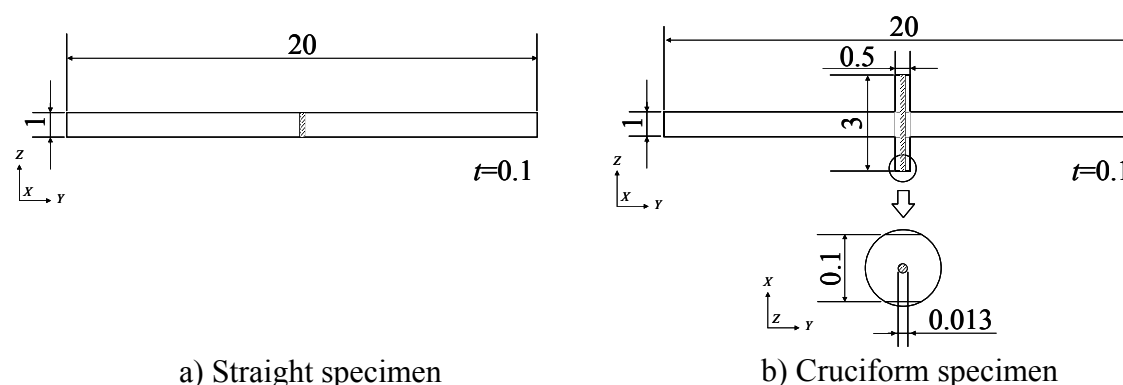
Schematic of specimens a) Straight specimen and b) Cruciform specimen
